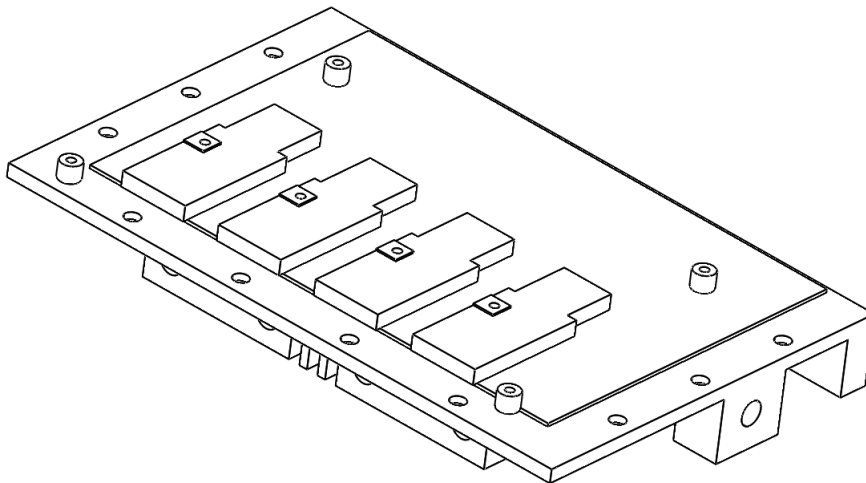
Top of the bottom part with the pedestals for the thermal connection between housing and PCB
